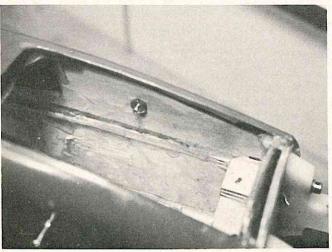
Engine rail extensions removed and area covered with fiberglass.
